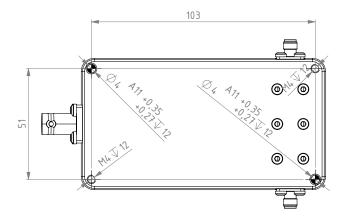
Bottom side fixation threads and dowel holes. All dimensions in [mm].
